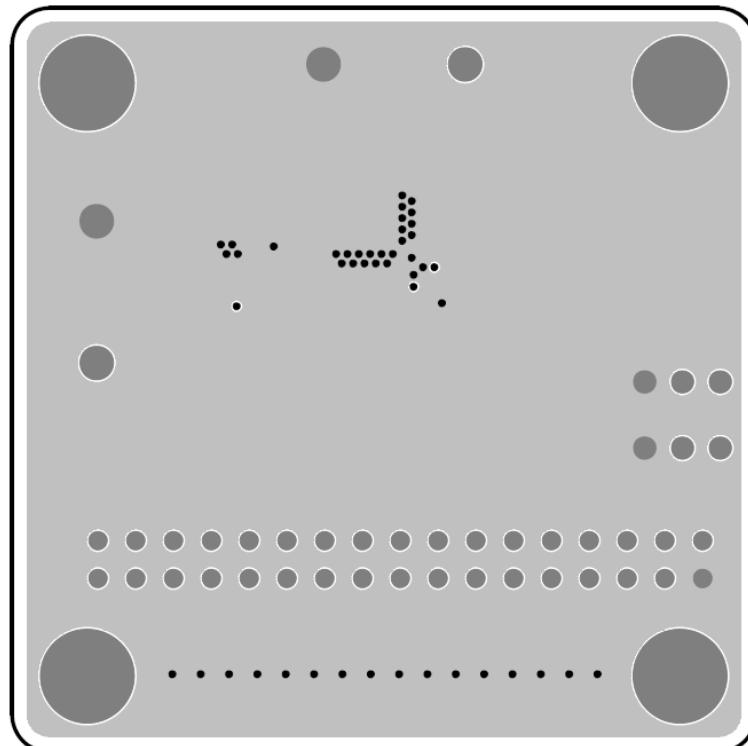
PCB Layout—Inner Side (2<sup>nd</sup> Layer)
